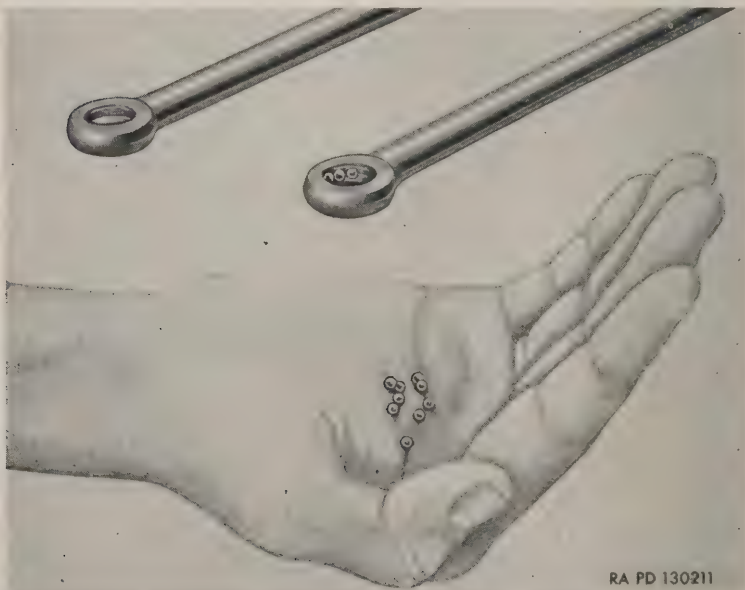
Removal of the ball bearings from the arm of the drafting machine—plotting boards M5 and M5A2.
